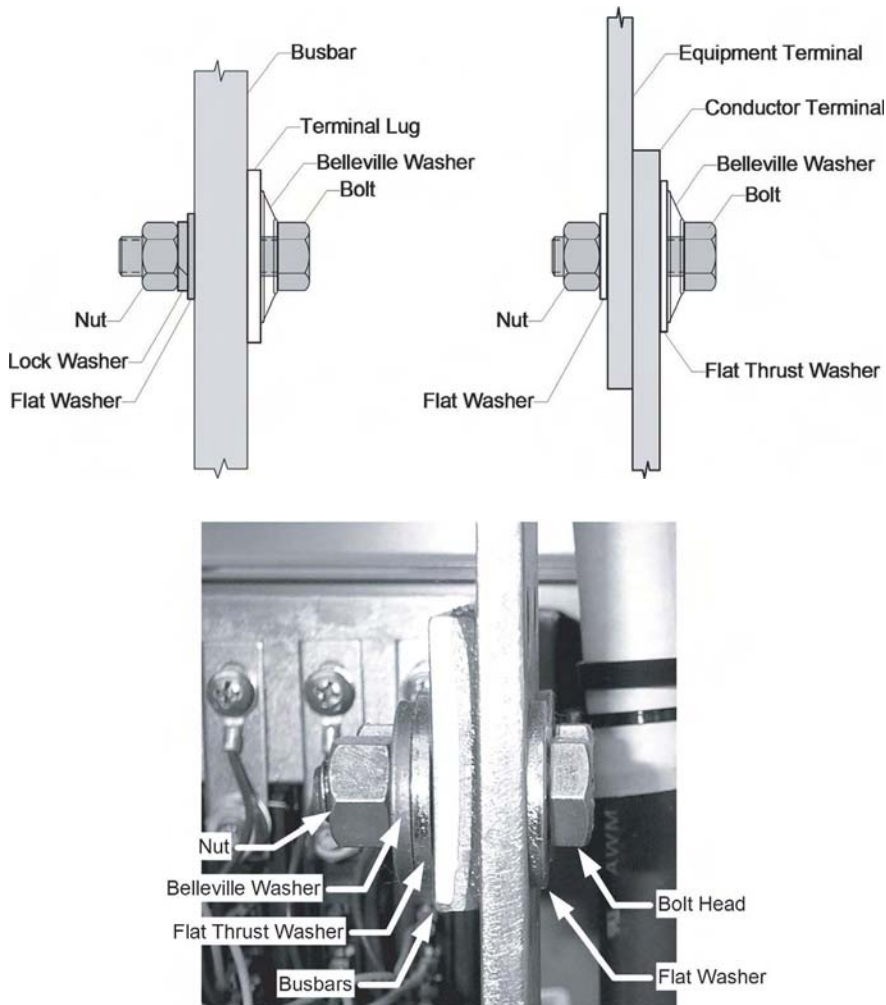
Belleville washer applications. The “cup” of the cone points toward the flat surface and the “peak” points toward the fastener head (*upper two drawings*) or nut (*lower photograph*).
